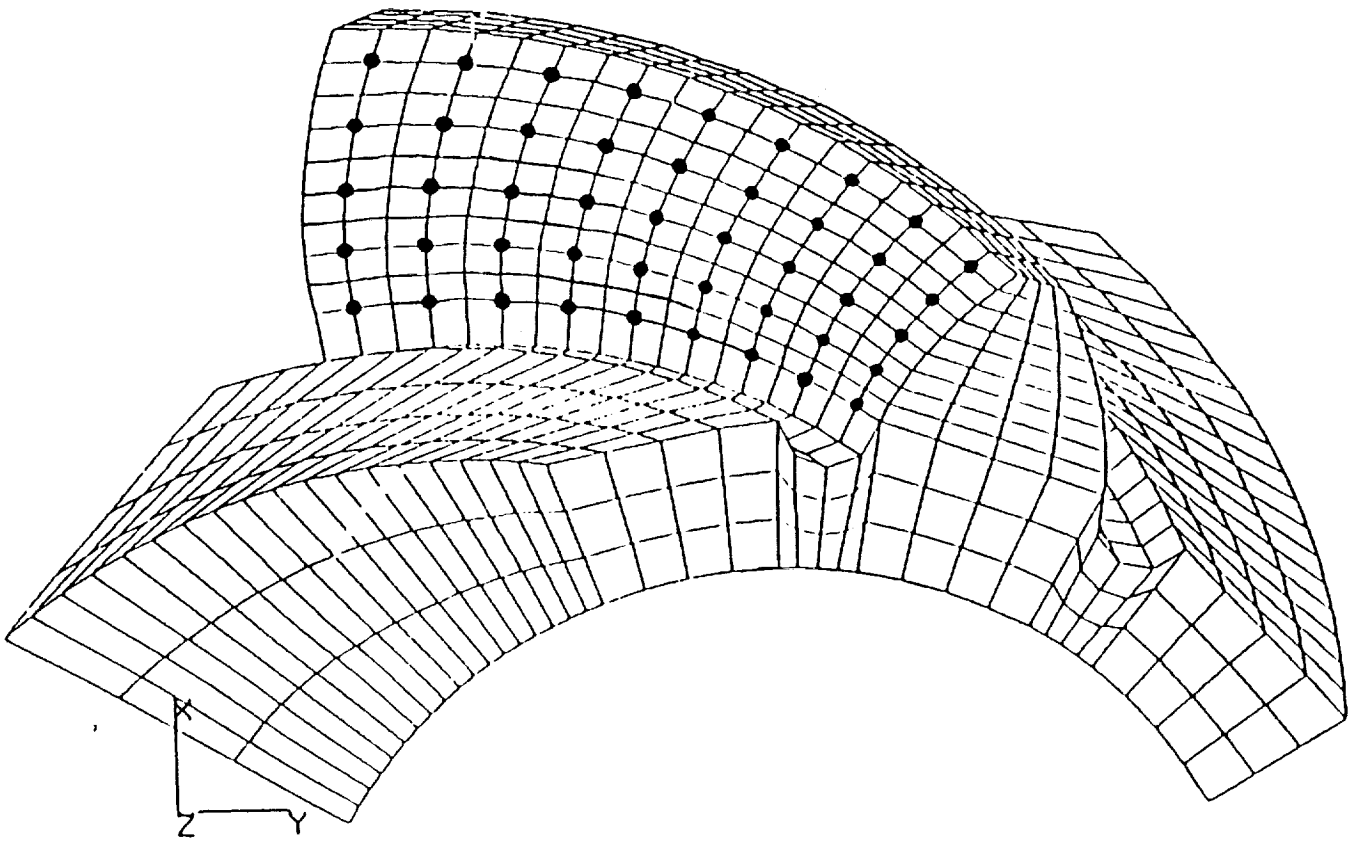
Surface Grid on a Spiral Bevel Gear
